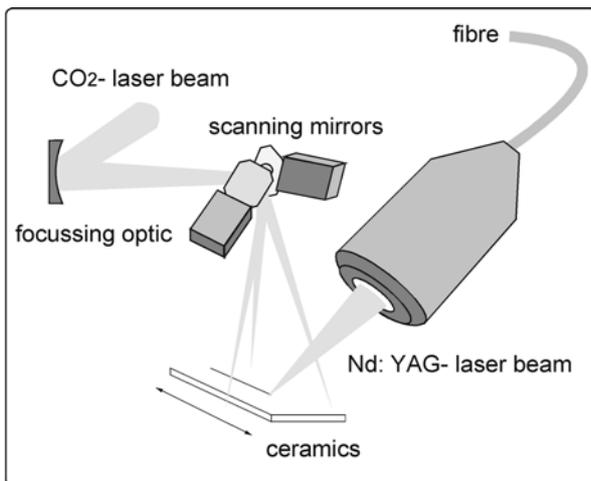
Experimental setup used for laser welding of ceramics.
